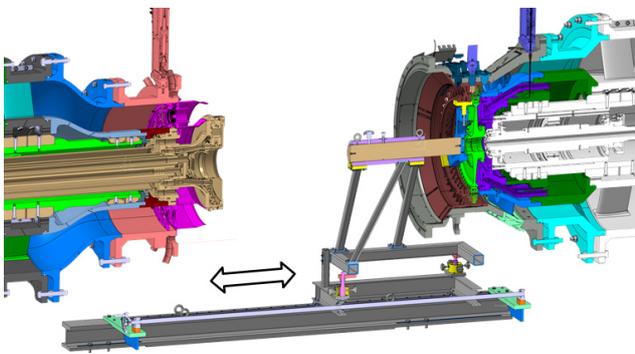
Mounting device usage in CAD view Figure 12: Mounting device + NGV ring at rig
